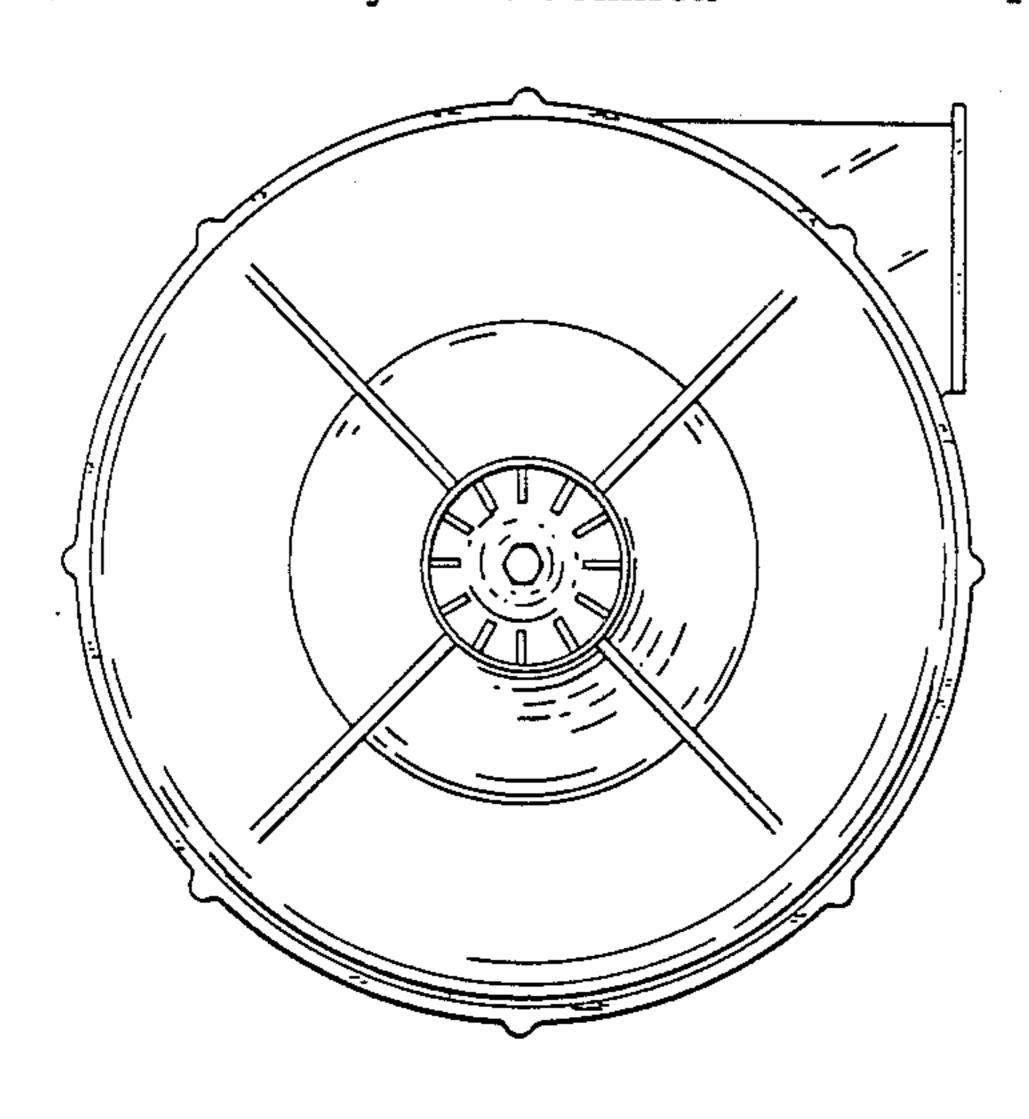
is a side elevational view of a fourth embodiment of the blower of my new design;
